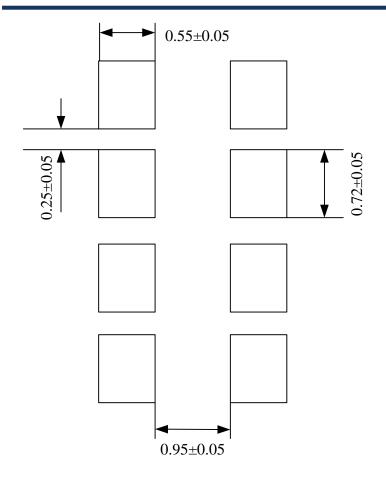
PCB layout design guide (all linear dimensions are in mm)
